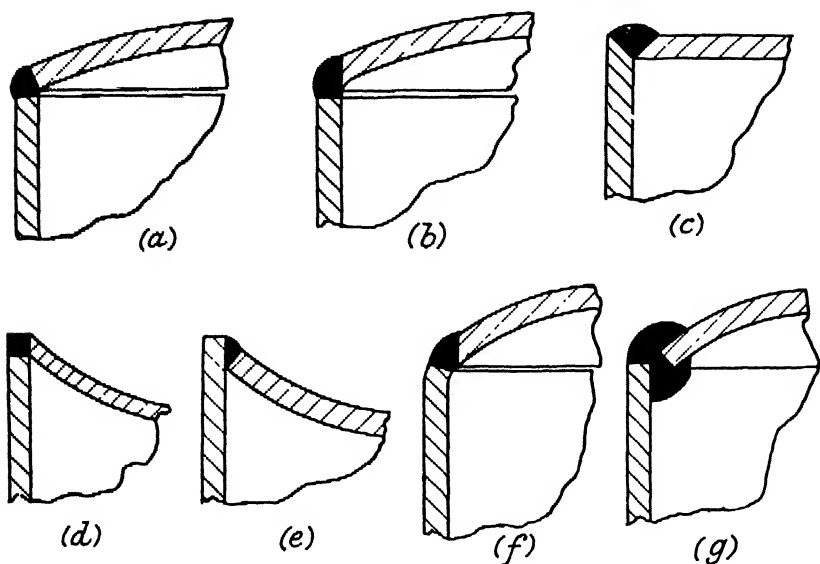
Ends not permissible under heading of corner welds.
